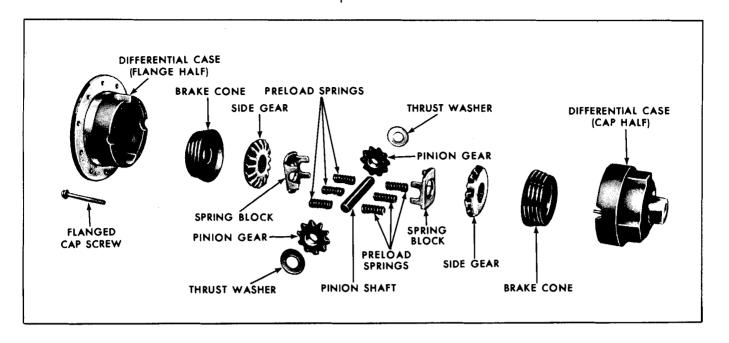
D-3 Type "C" Safe-T-Track Differential (With Brake Cones) - Exploded View
